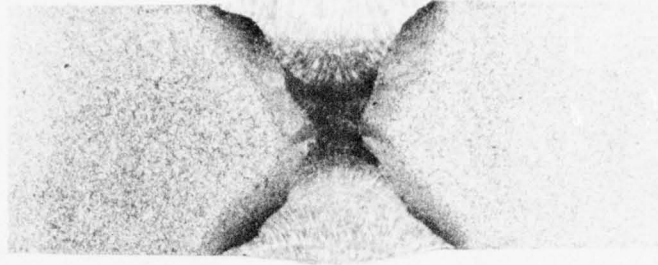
Typical multipass, automatic GMA weld for high strength steels— 1-in. (25 mm) plate.
